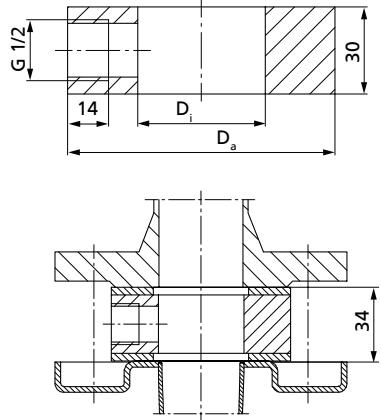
Dimensions of the pressure gauge connection (intermediate flange) [mm]
